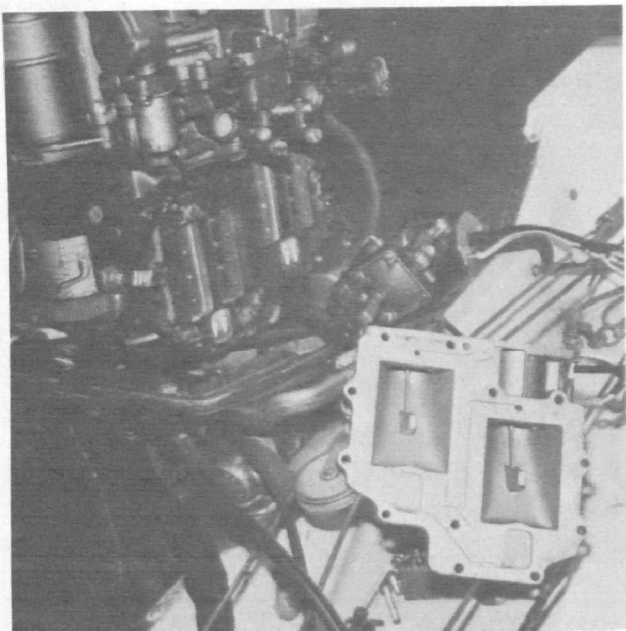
Engine 10 (OMC V-4) partially disassembled, showing drainage reed valves below ports in reed block (left) and stock inlet manifold (lower right)
